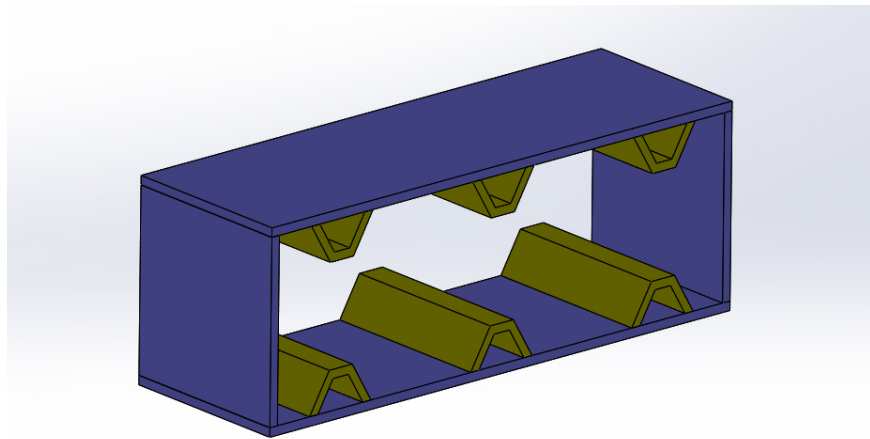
Unit cell of Wingbox Structure with trapezoidal reinforcements.
